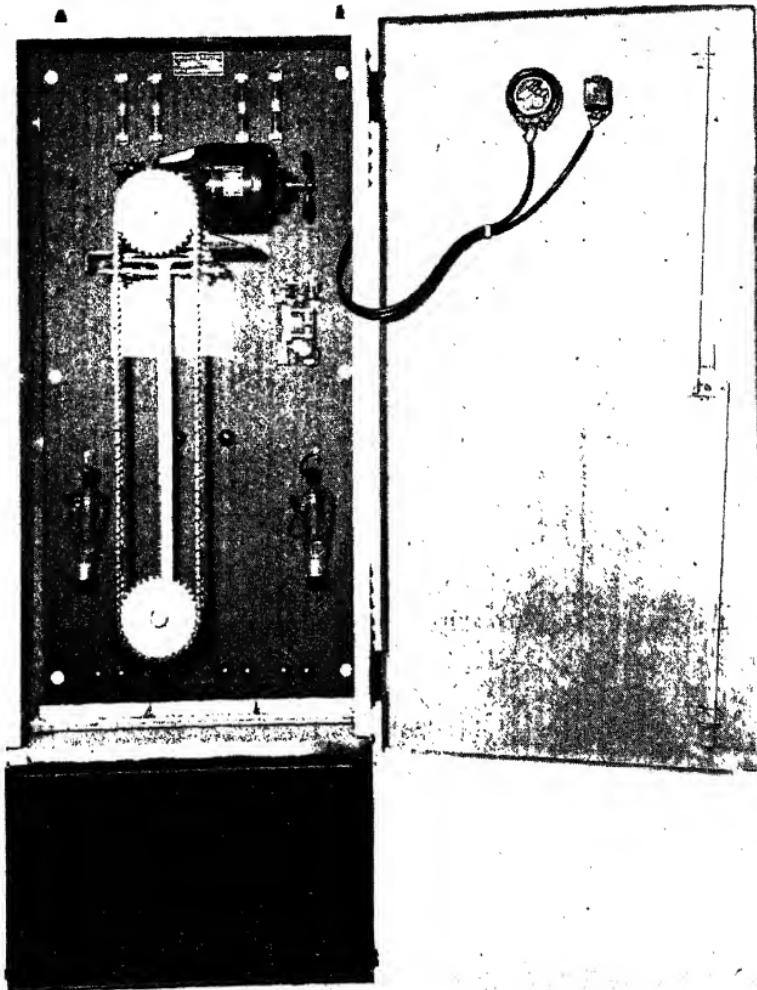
A.—Seam-welding control CR7503-B102.
